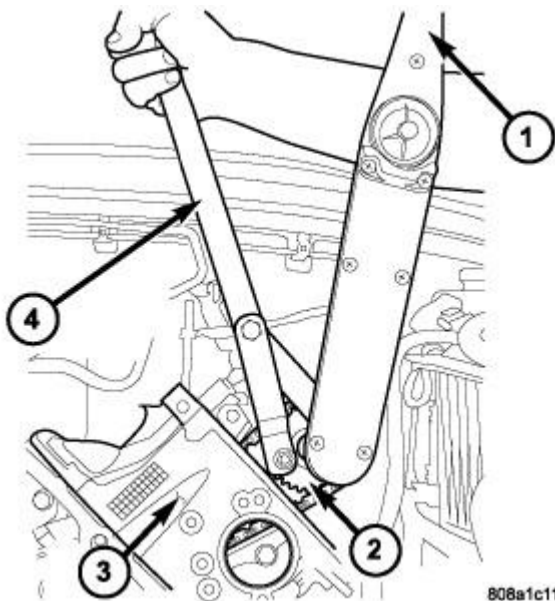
Tightening Left Side Camshaft Sprocket Bolt
